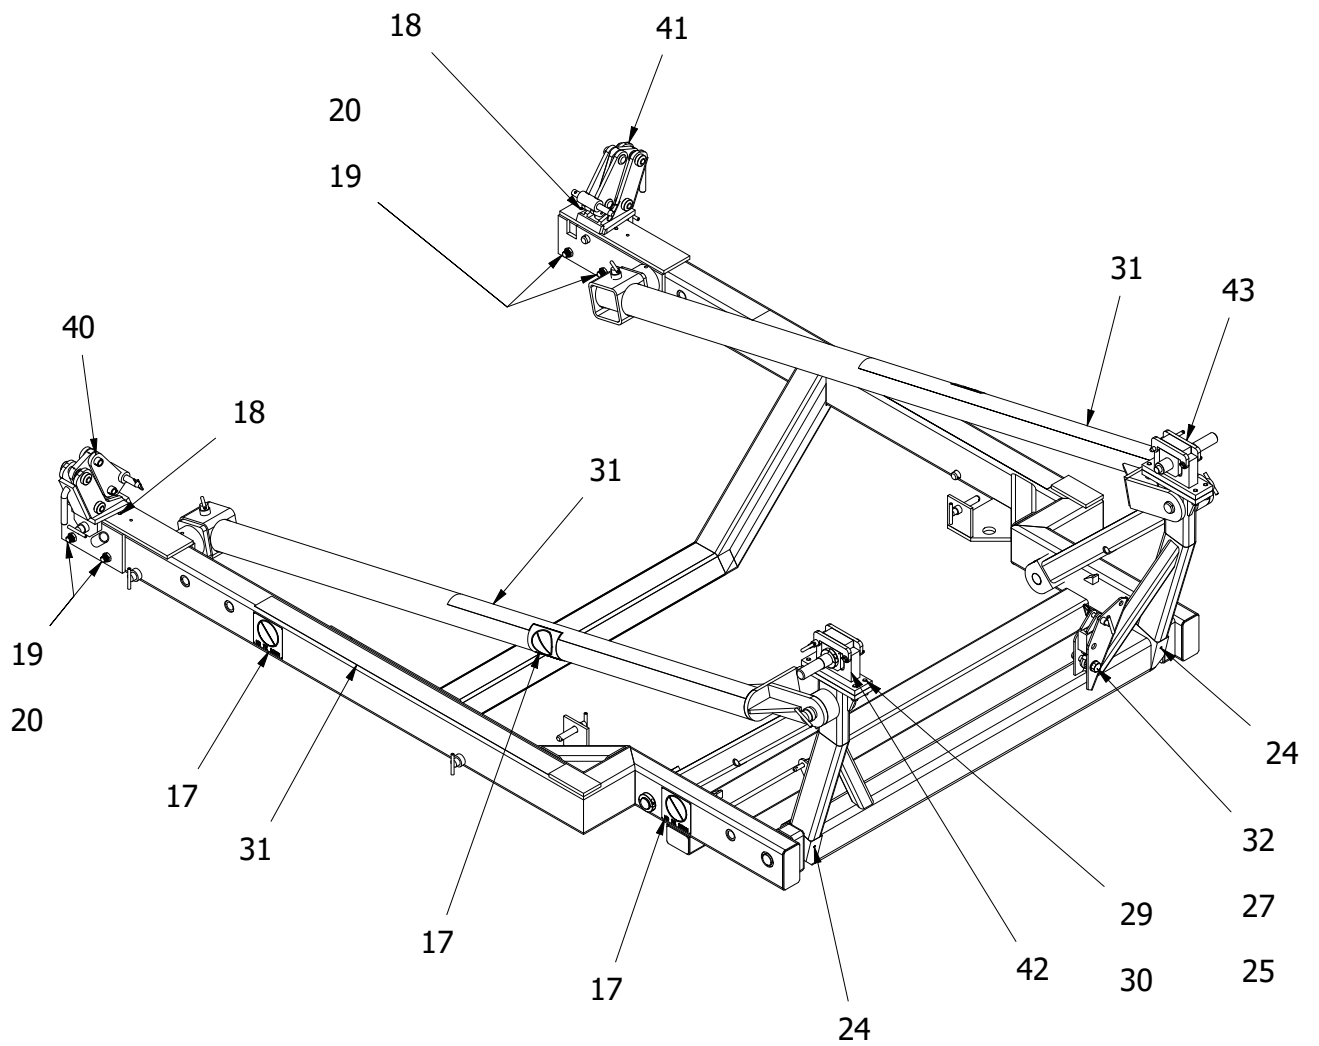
AM-1928-156-80C2 Cradle Assembly w/o Bootstrap Adapter for CF6-80C2
